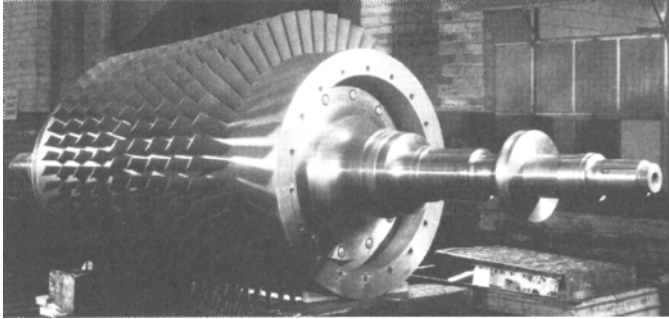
Axial rotor assembly. (Used by permission: A C Compressor Corporation.)
